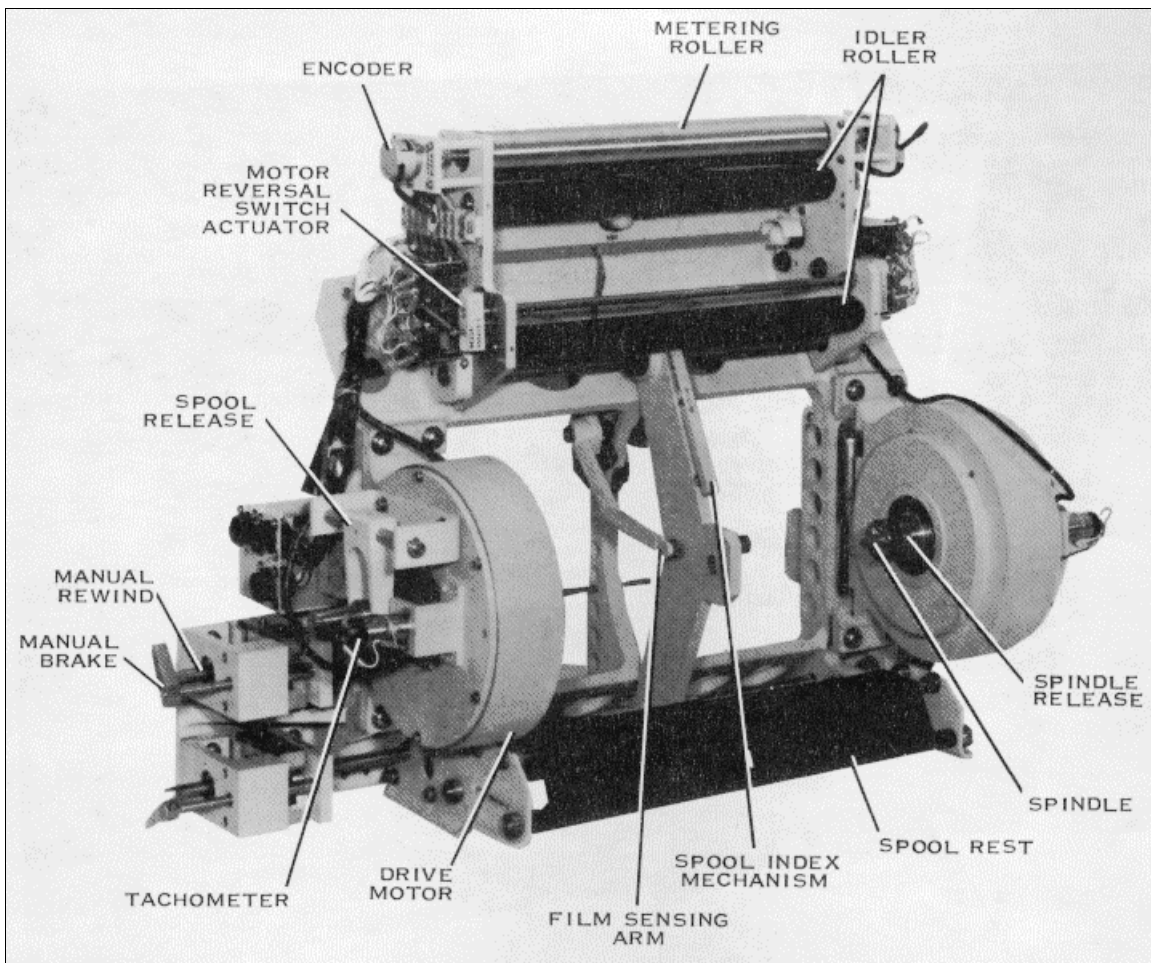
Left Film Transport Assembly A7, Parts Identification
